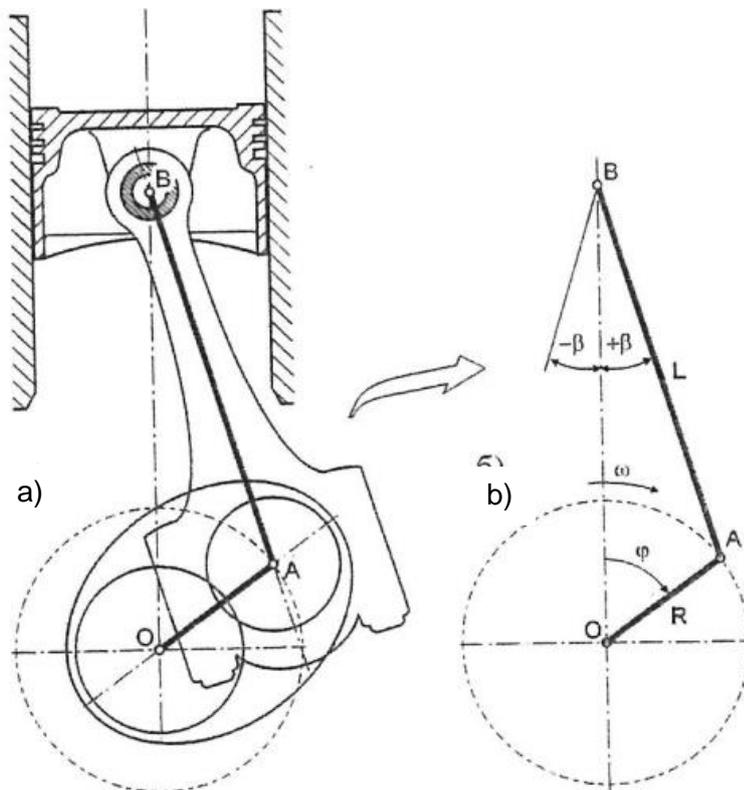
Kinematic diagram of engine slider-crank mechanism (84)
